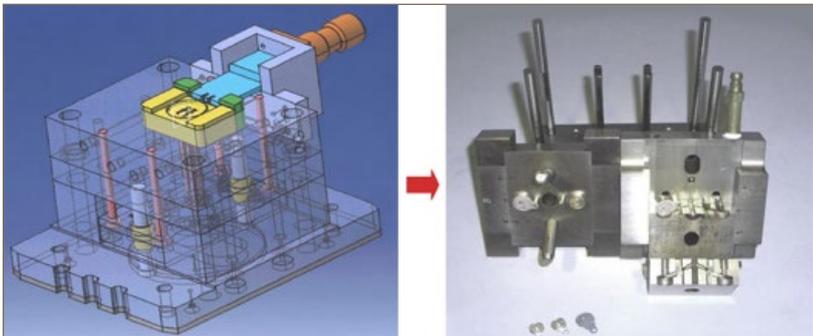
Aluminium tooling and inserts are used to produce larger volumes (100 to 500) of MIM prototypes.
